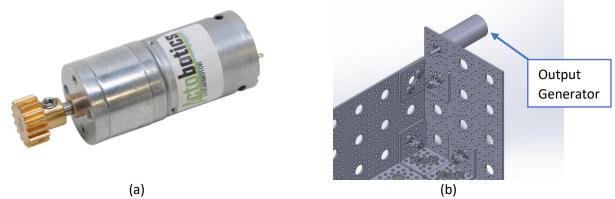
(a) 970 RPM motor acting as generator, (b) Motor mounted on housing
